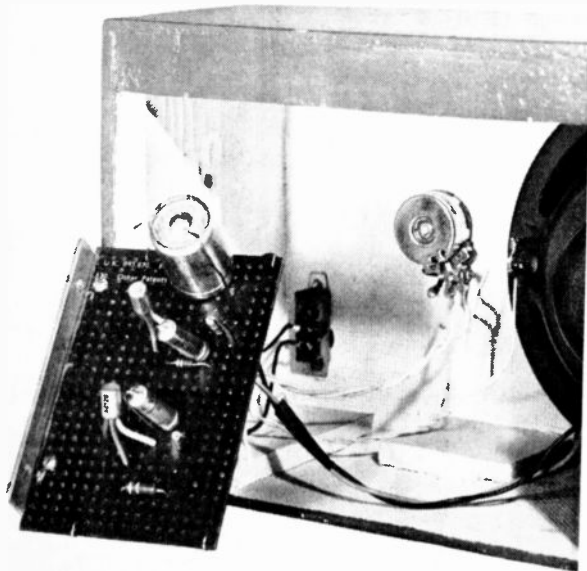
Layout and wiring of the components mounted on the Veroboard
